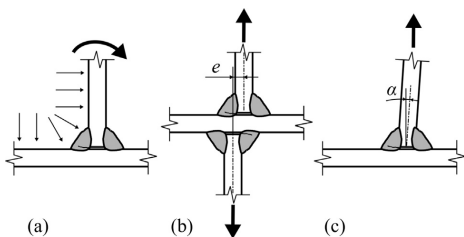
Fillet welded LC joints where bending stresses are induced by: (a) external bending loading or structural discontinuity, (b) plate axial offset, and (c) angular misalignment.
